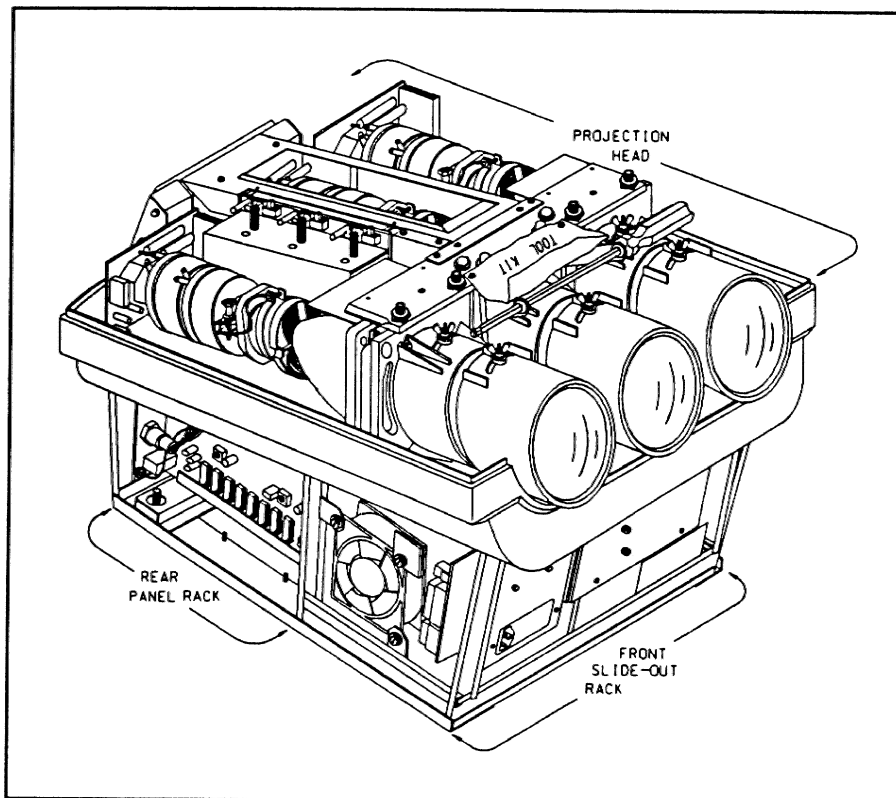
Projector Module and Component Areas (covers removed)
